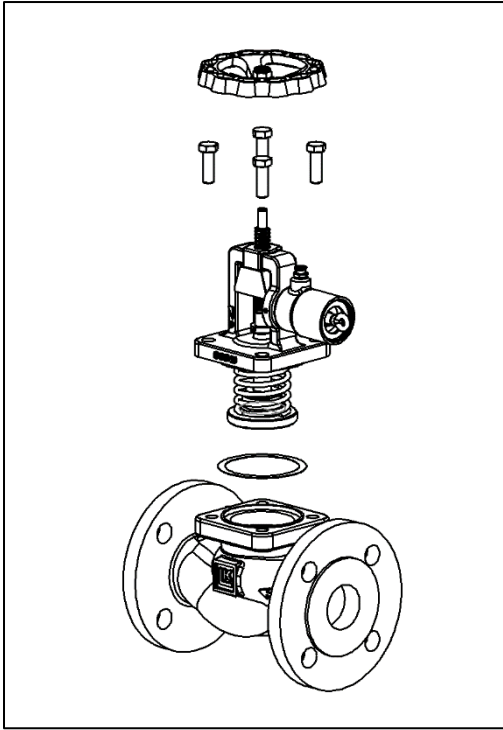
Disassemble bolts and handwheel to separate bonnet and body. Replace the old gasket with the new.
